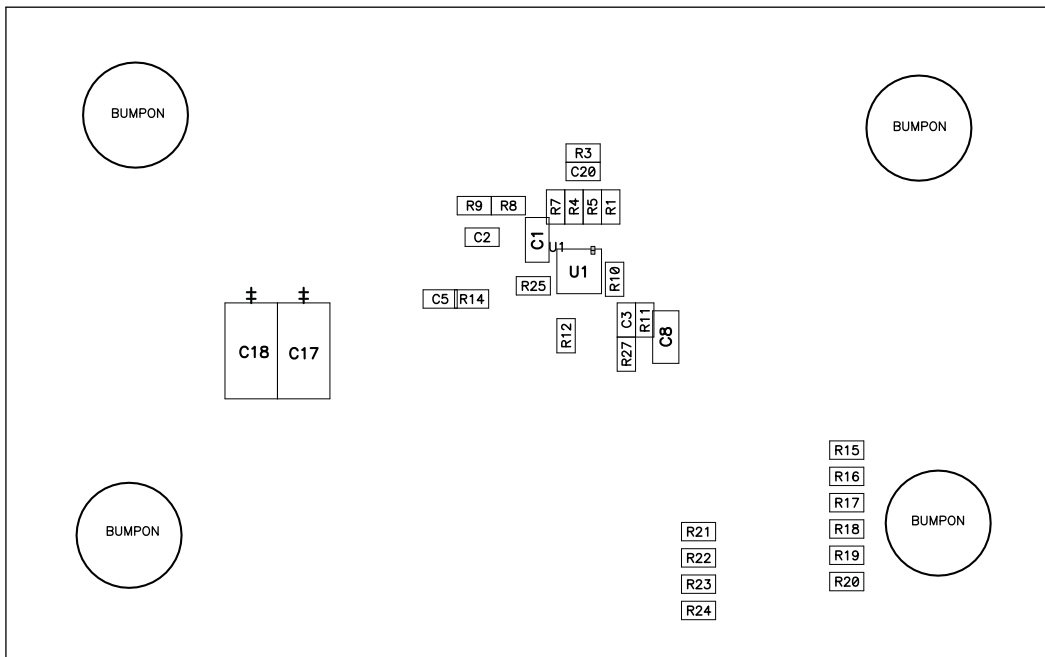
TPS53219EVM-690 Bottom Assembly Drawing, Bottom View
